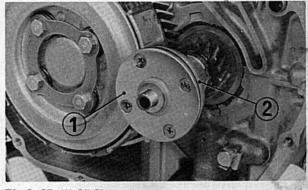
(1) Oil filter cap (2) Oil filter rotor
